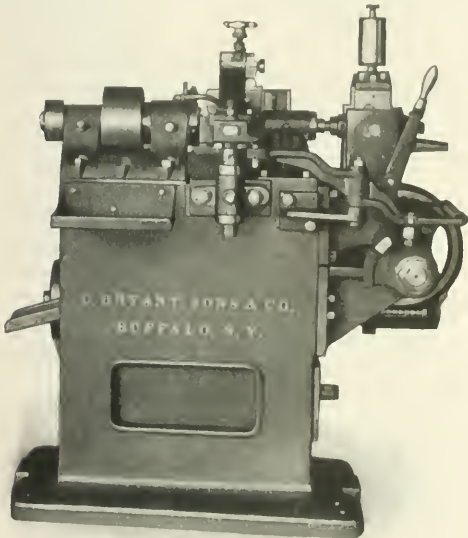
Front View of Bryant Radiator Nipple Turning Machine
